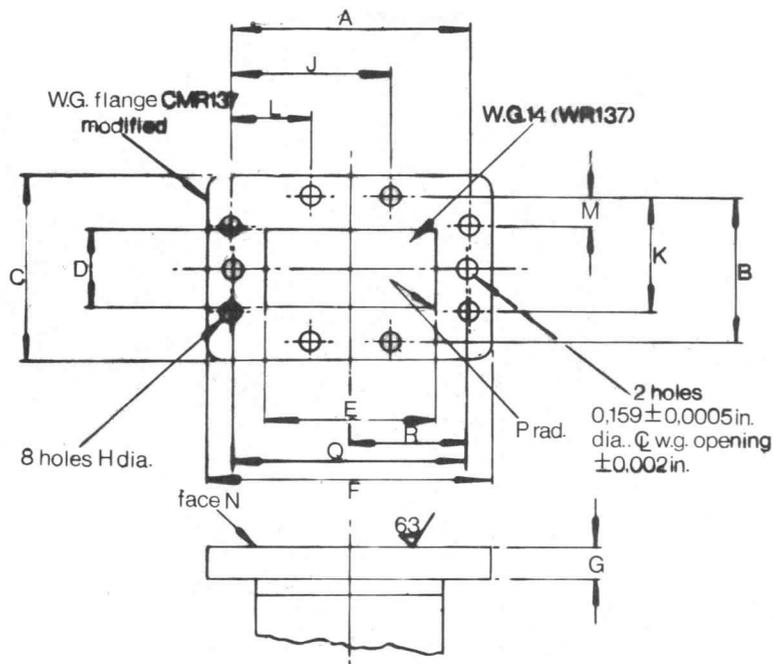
Outline of Flange 53/WGF/14/3 for WM112C Mount
